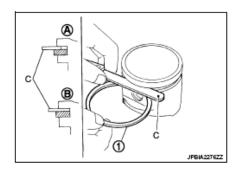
Measuring Side Clearance Of Piston Ring And Piston Ring Groove Courtesy of NISSAN MOTOR CO., U.S.A.
